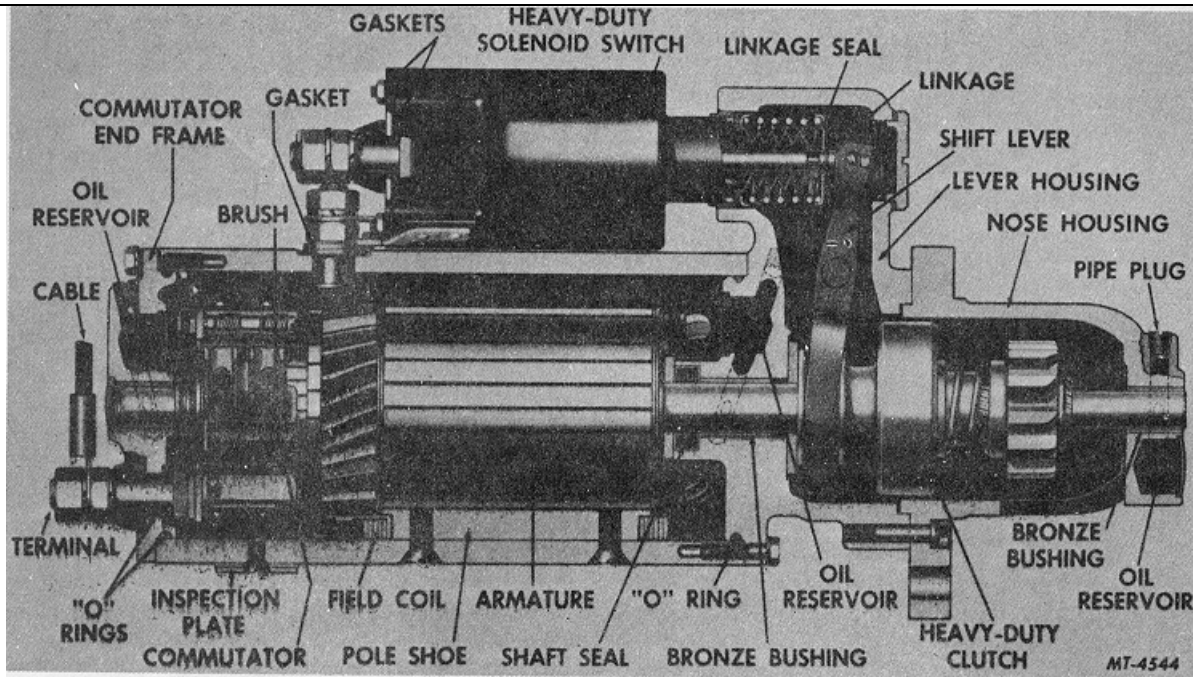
Sectional View of Starting Motor with Heavy Duty Sprag Clutch
